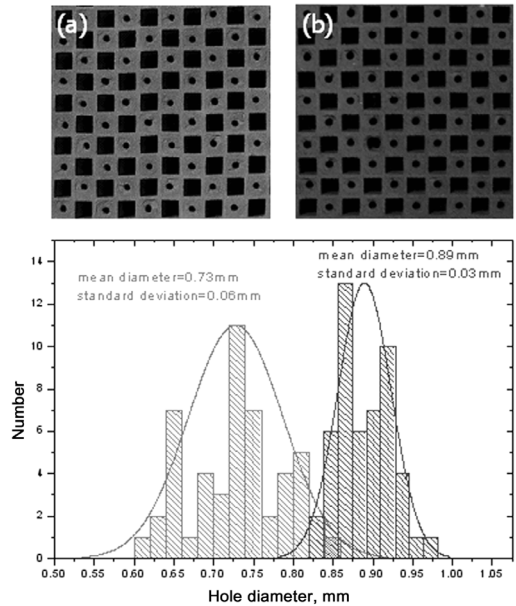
Hole diameter of COT filter (a) Hole size=0.7mm, (b) Hole size=0.9mm
